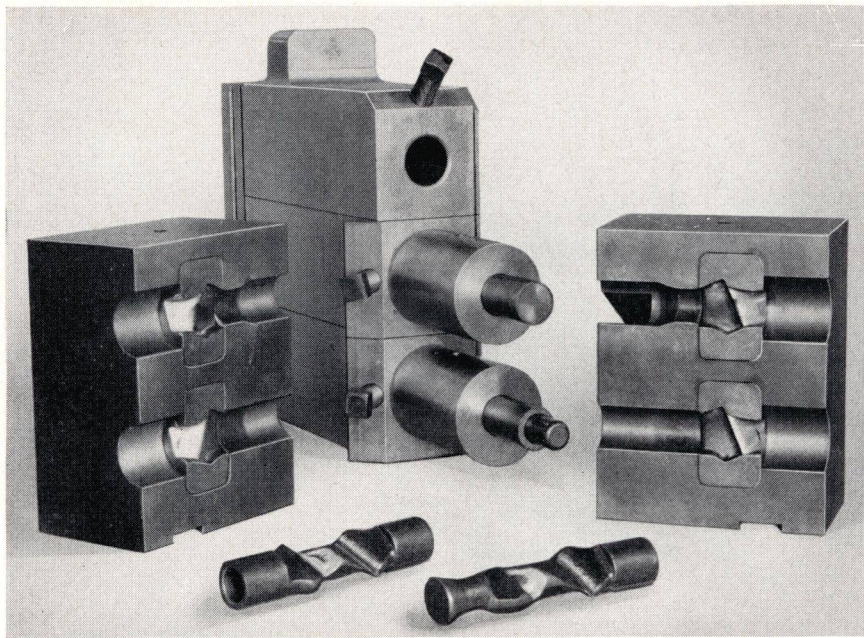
Dies for forging cross-bar end for tubular airplane strut member.
